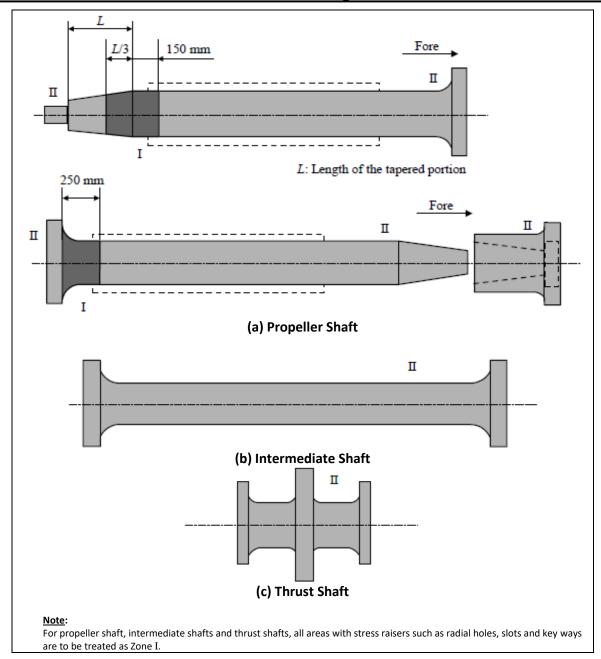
Zones for Magnetic Particle/Liquid Penetrant Testing on Shafts
